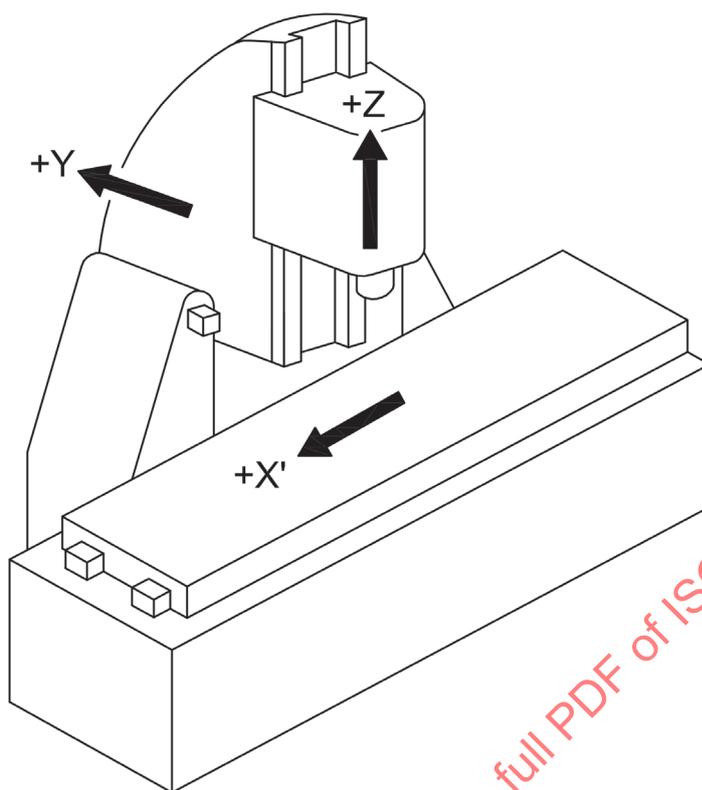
Example of a single column bed-type milling machine with vertical spindle
